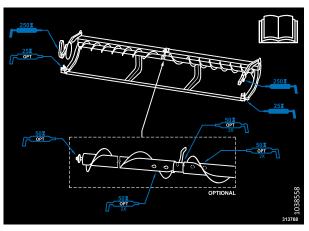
Decal for Single-Knife Header with Two-Piece Upper Cross Auger
